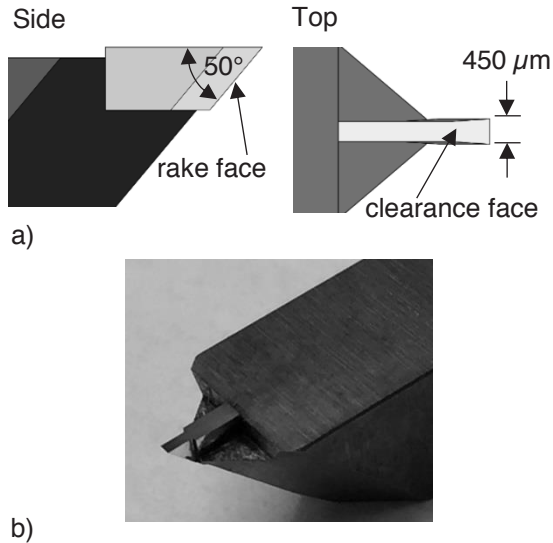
Geometry of USPIC tool: a) CAD rendering, and b) physical tool.
